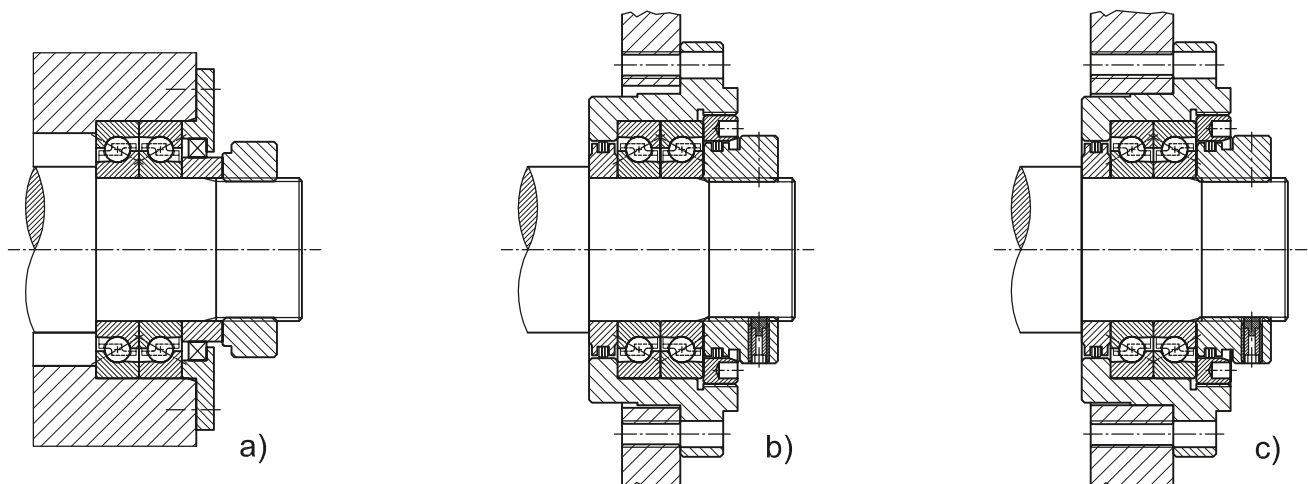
Mounting examples for precision bearings for ball and roller screw drives
